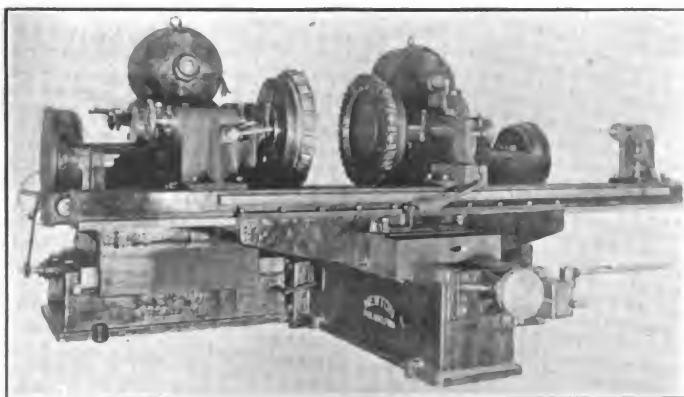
End view of the Newton Crankshaft cheek milling machine
